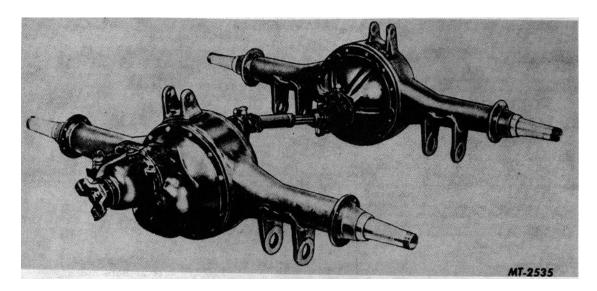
IH Thru-Drive Tandem Rear Axle.
